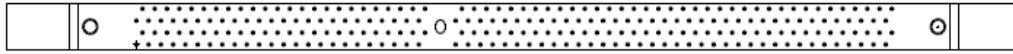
PCB Connector Footprint refer to JEDEC SO-007 for details
